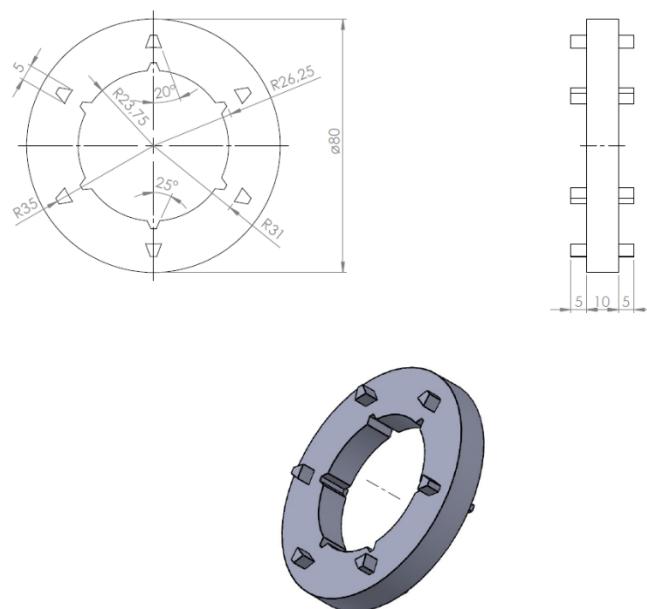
Disk 1<sup>st</sup> - 2<sup>nd</sup> - Technical drawing.
